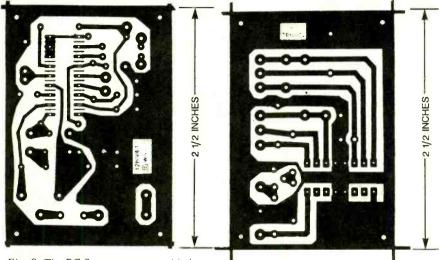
The RC System was assembled on three printed-circuit boards; a full-scale template of the transmitter (which was mounted in a small aluminum box) is shown here.
